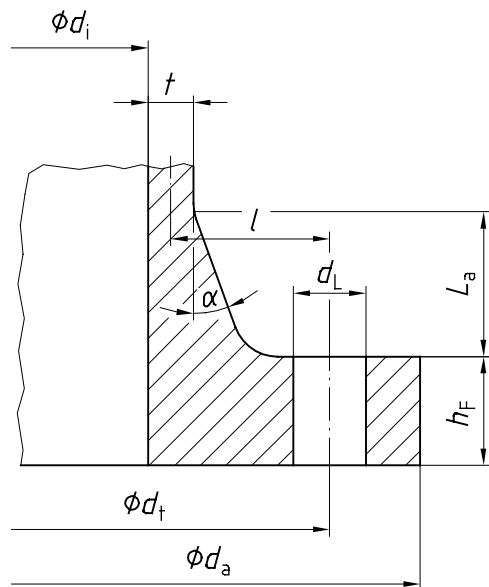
Fusion welded, moulded full face flange (shown without gasket)
